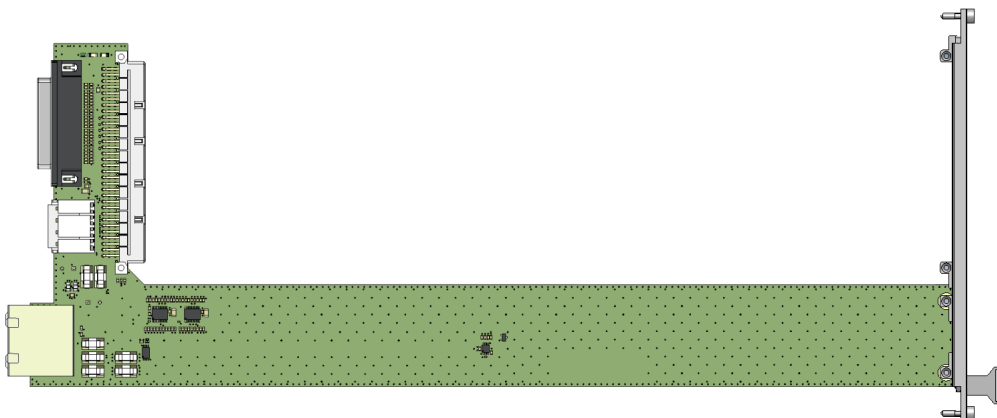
ES5371.1 Carrier Board for ES443x Load Boards (View from the Side)
